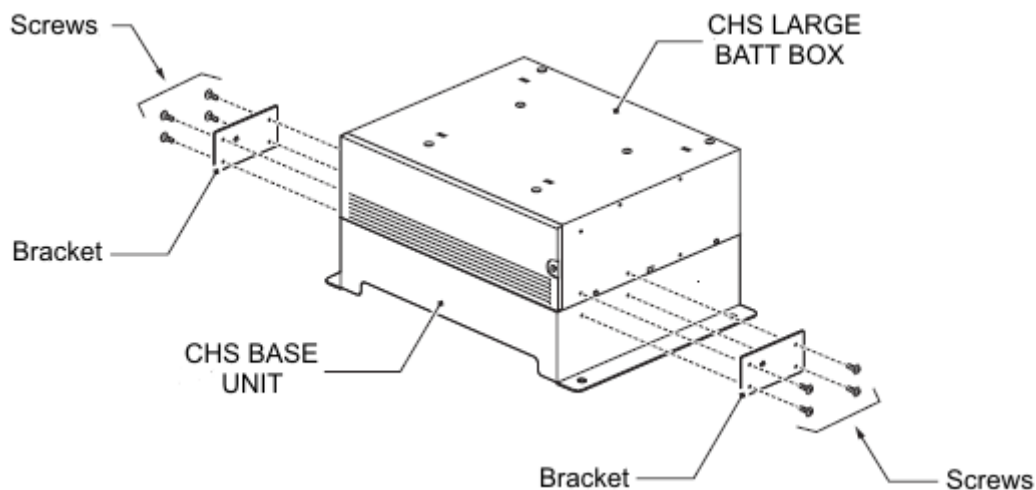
Installing the CHS LARGE BATT BOX using the CHS2U JOINT BRACKET KIT
